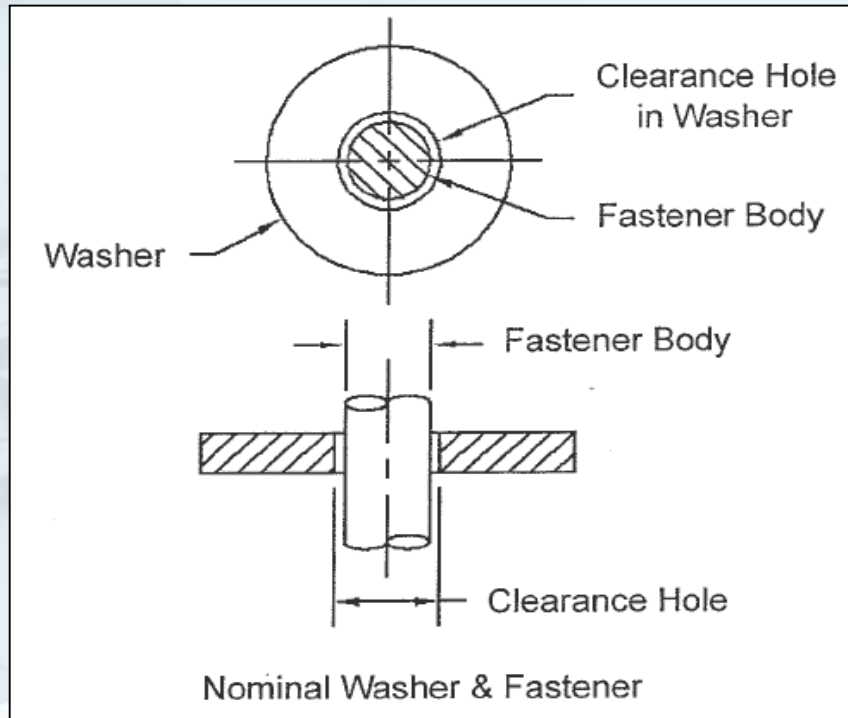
Worst-case chain of Dimensions and Tolerances #7.
